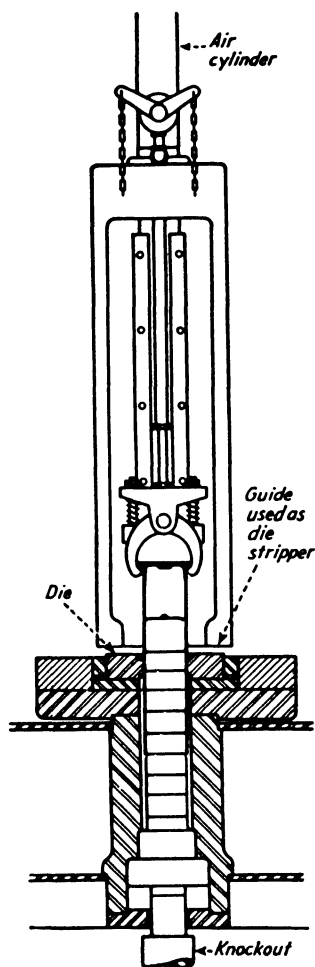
A pneumatically operated gripping fixture lifts the case from the heading die.
